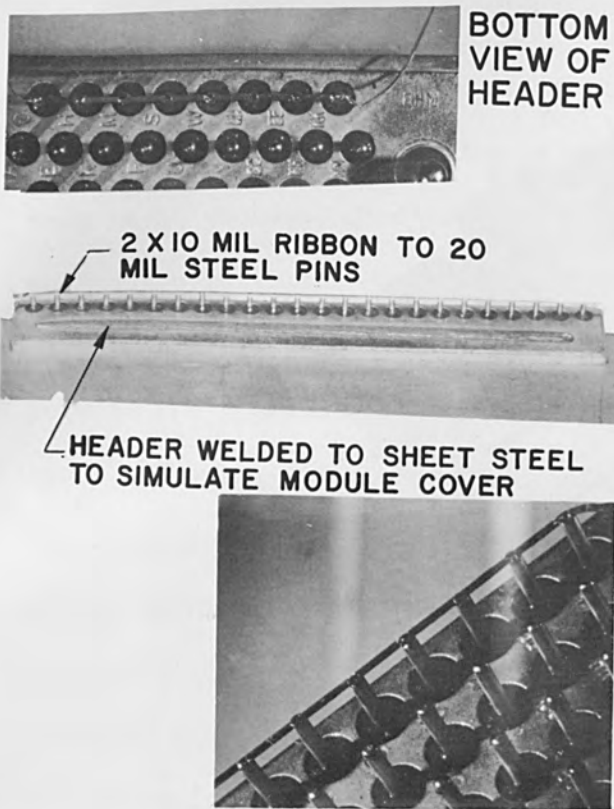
Copper Leads Welded to Hermetic Header Pins
